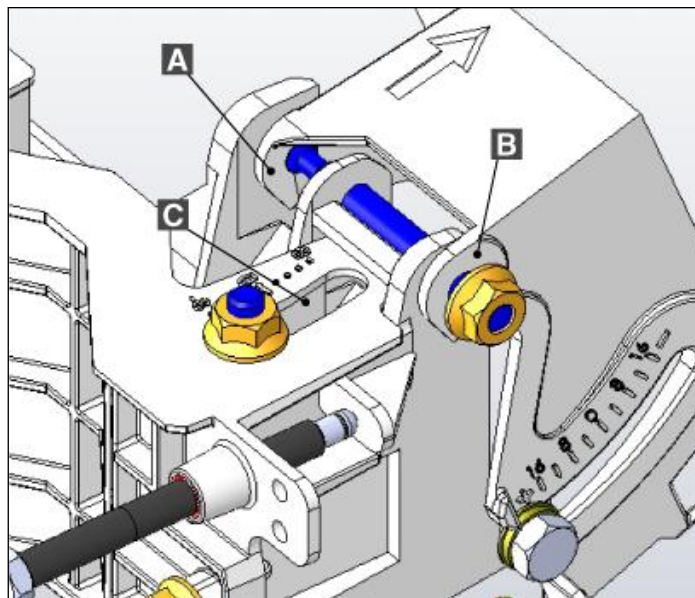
EtherHaul 1200 Mounting Assembly Components
